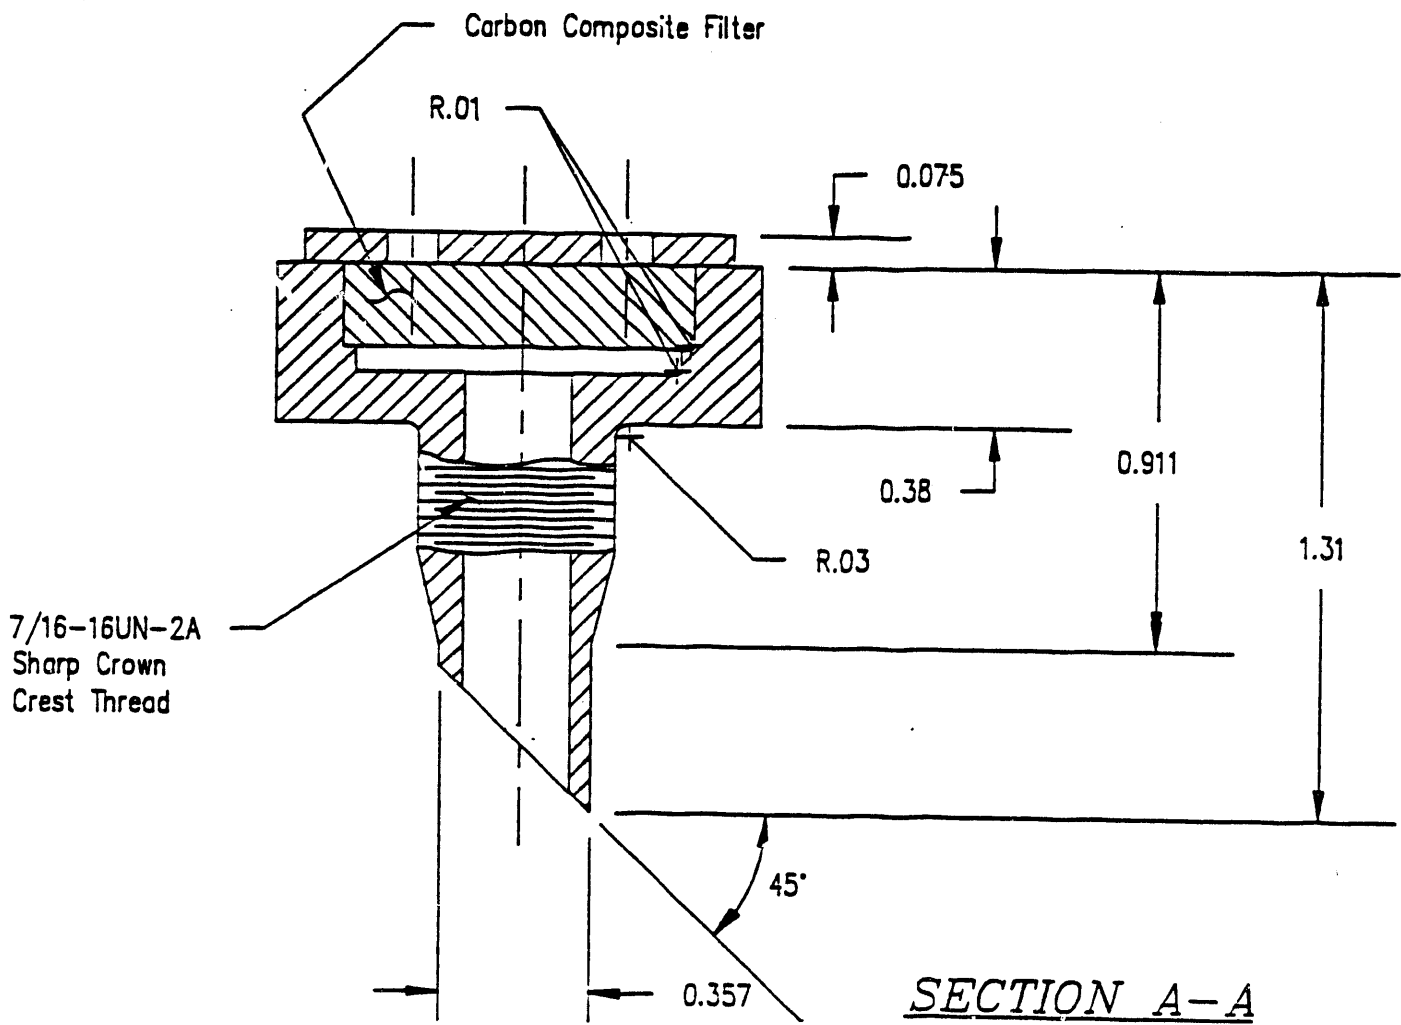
Punching and Filter Insertion Machine (P&FIM) Filter Assembly
